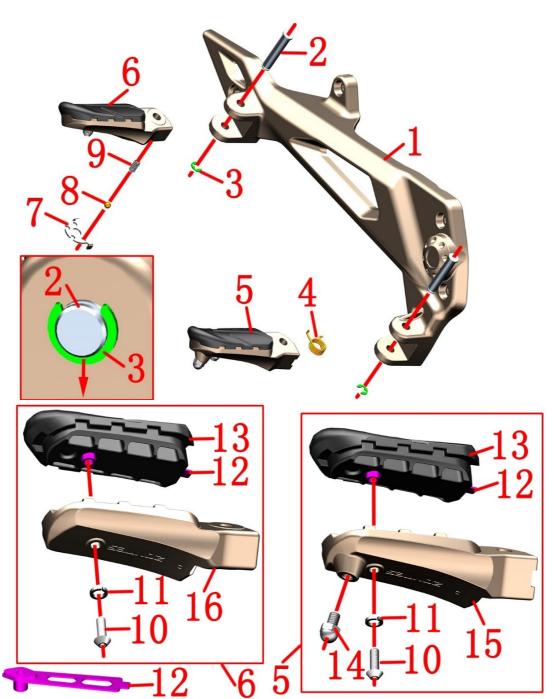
F	FOOT PEDAL	New right footrest component-3	CHK	40)
